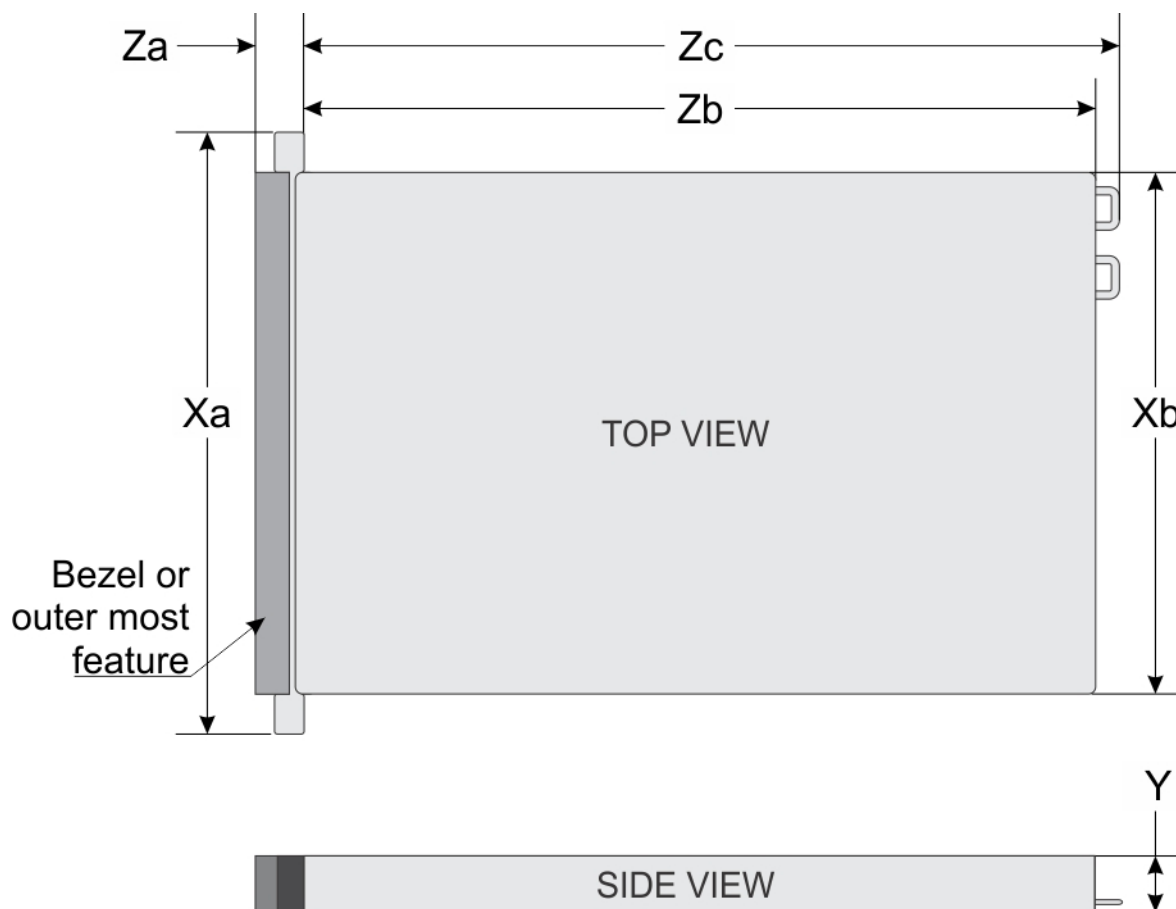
Dimensions of the Dell EMC PowerEdge R440 system
